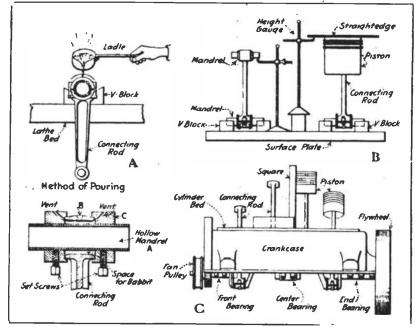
Suggestions for remetalling connecting rod bearings when bearing metal must be poured in
